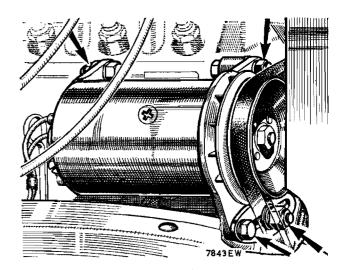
The four dynamo attachment points to be slackened for fan belt adjustment
